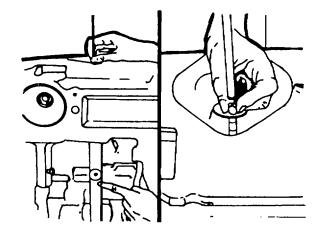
Oil Dosing Plug/Installing Oil Dosing Plug
